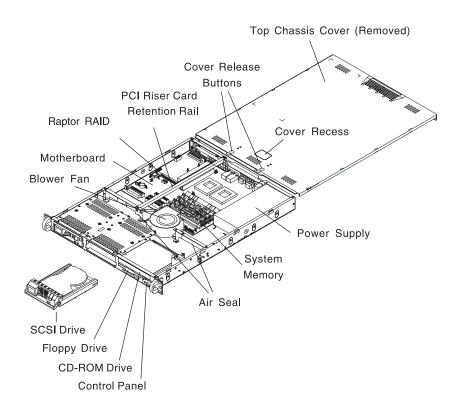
Accessing the Inside of the SuperServer 6011H (with one SCSI Drive removed)
